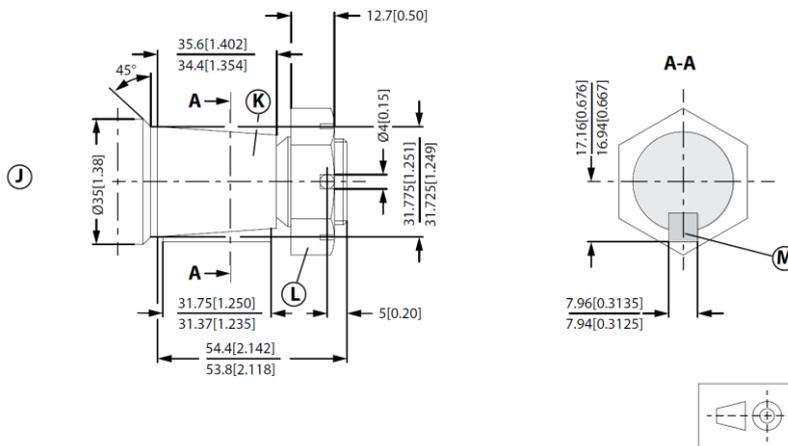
OMR shaft version: Tapered shaft 1 ¼ in (taper 1:8); SAE J501
